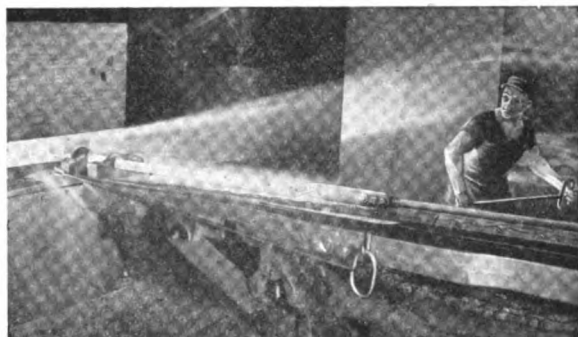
DRAWING OF BUTT WELD PIPES
